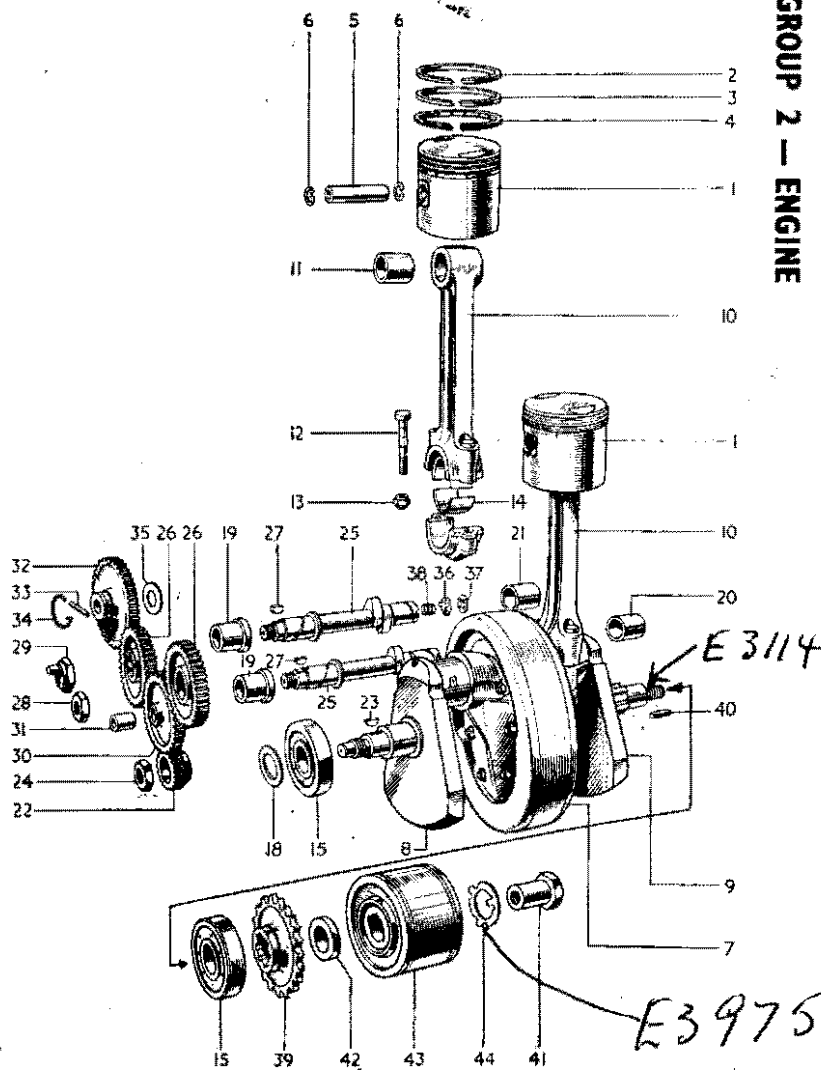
CRANKSHAFT, CONNECTING RODS, PISTON TIMING GEAR, etc.
